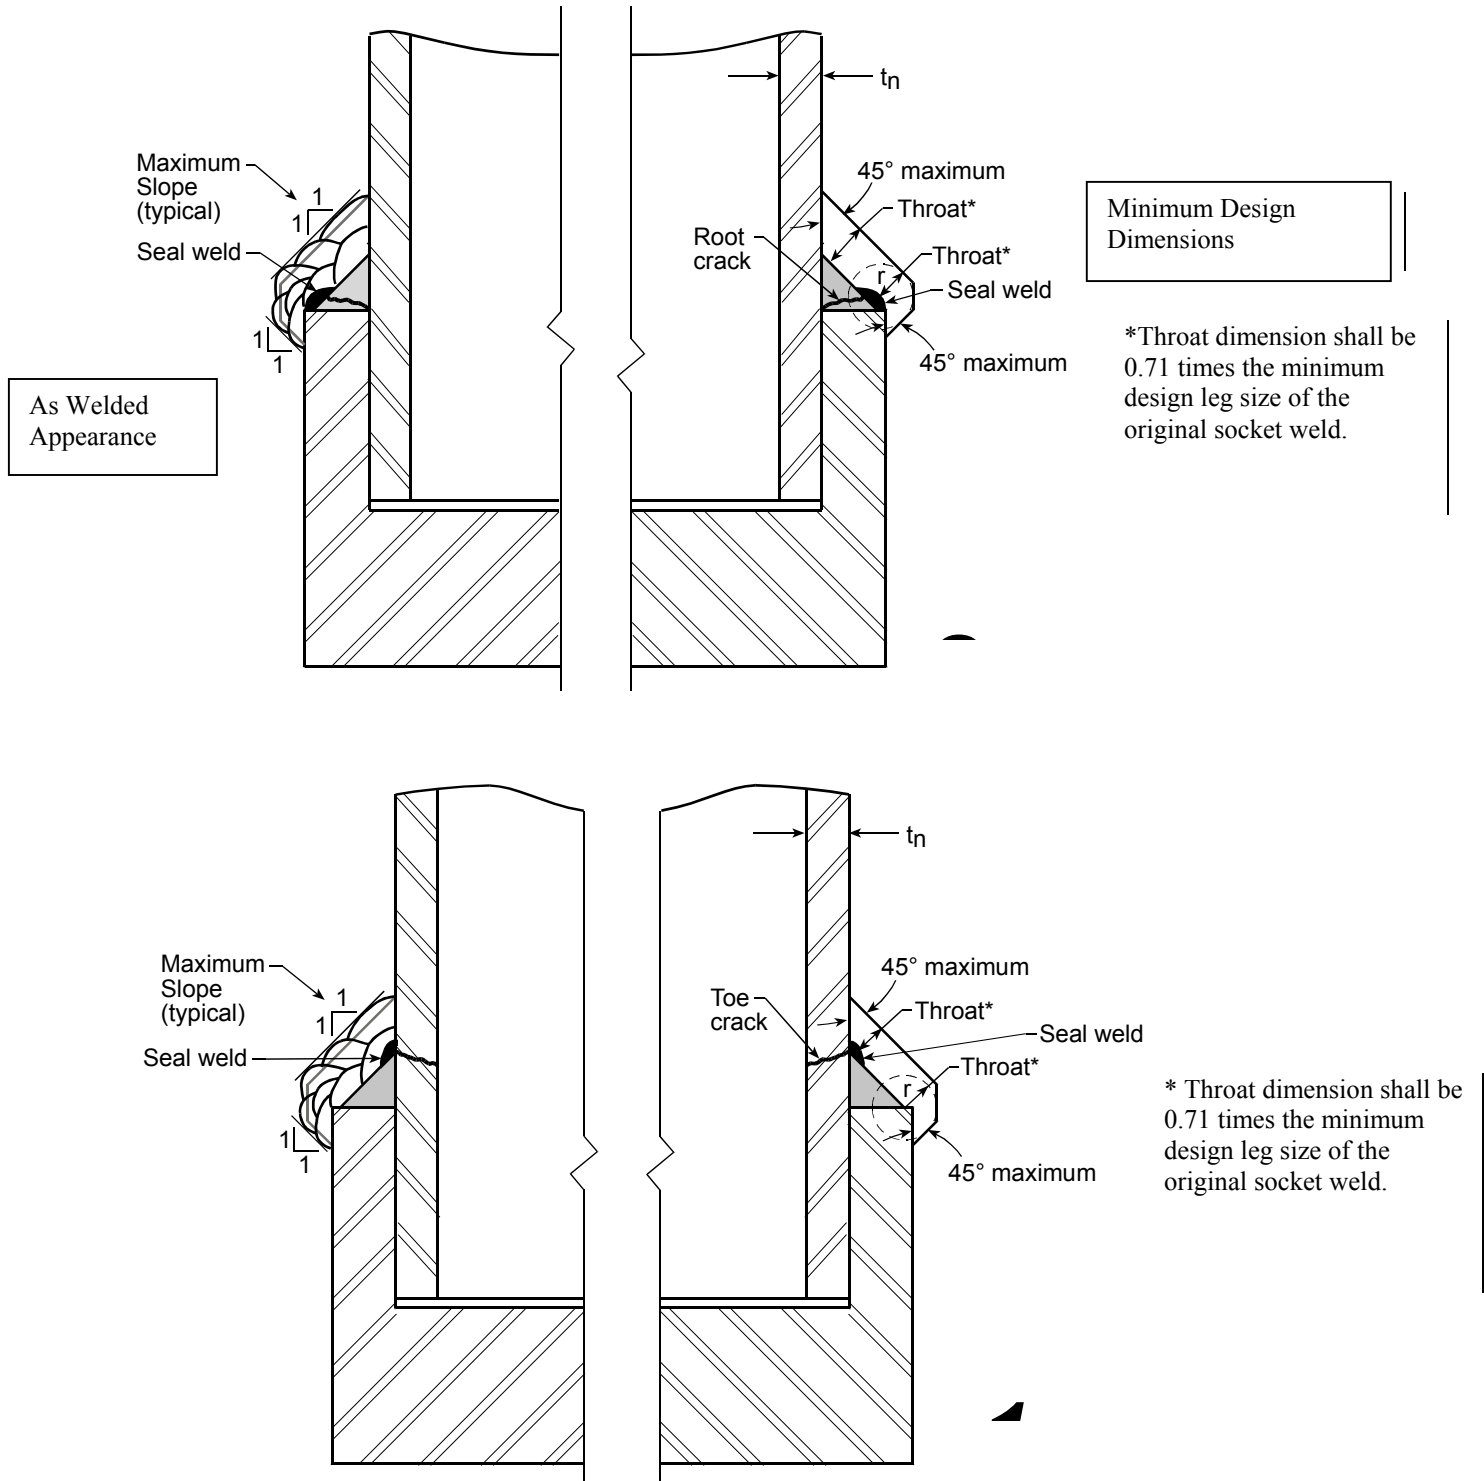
Socket Weld Reinforcement Dimensions. The right side of the figures shows the design dimensions while the left side shows the as-welded appearance. The final surface of the overlay may be left in the as-welded condition.
